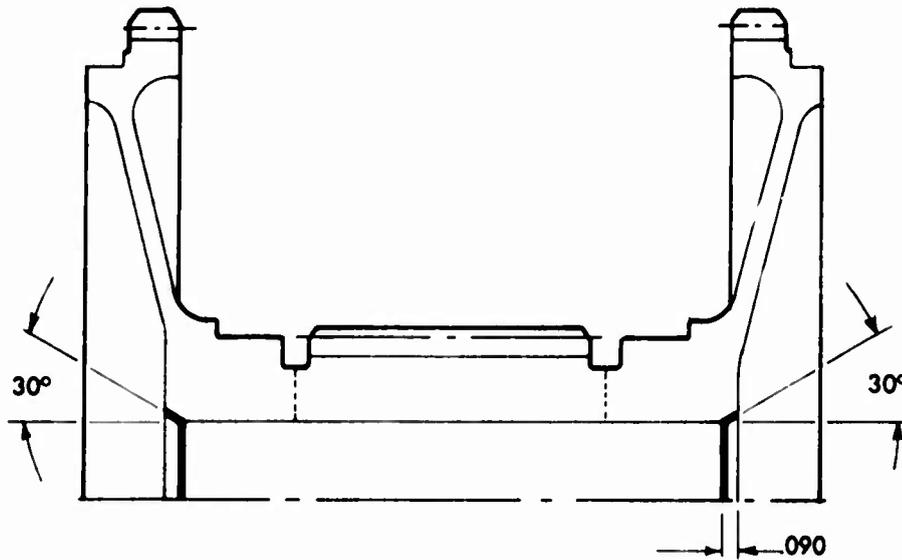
RG351-11182-063, Machine Operation Drawing.
